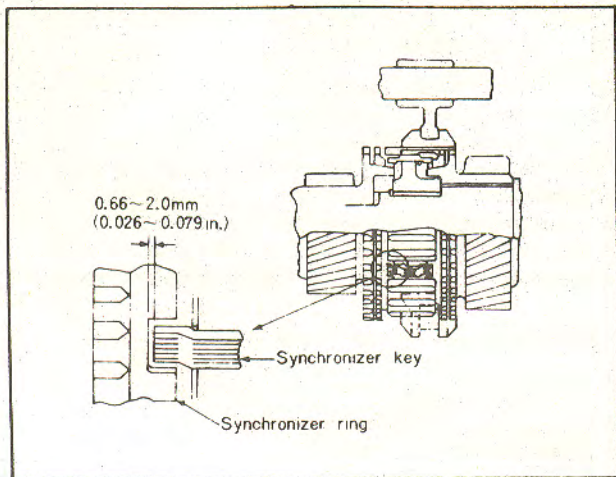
Checking the clearance between the synchroniser key and the exposed edge of the synchroniser ring with a feeler gauge.
